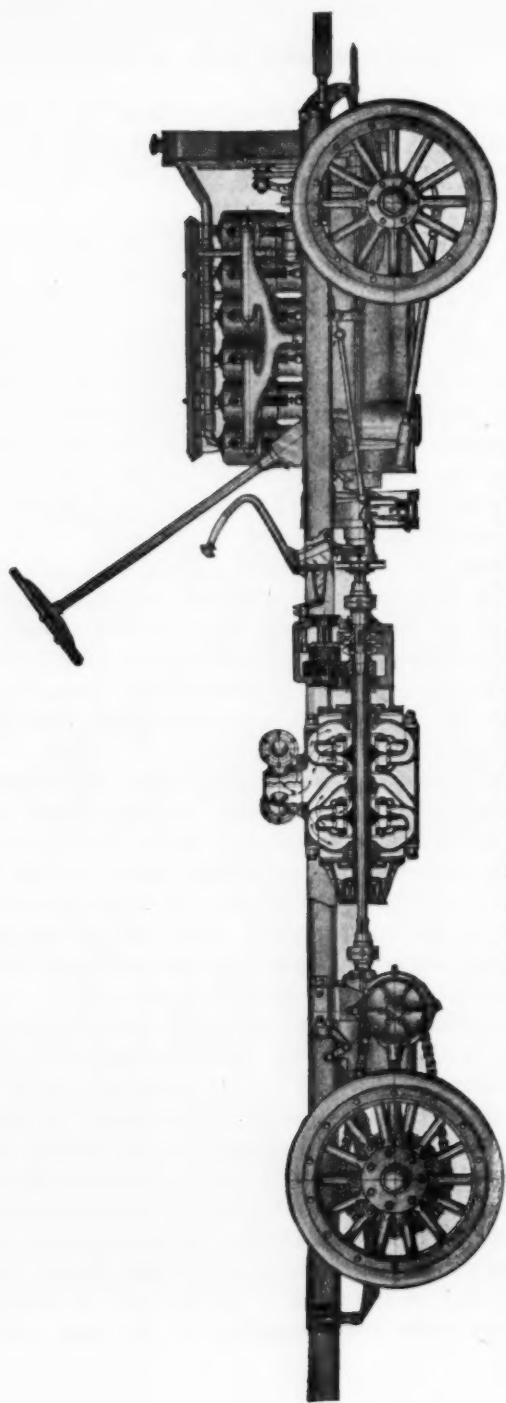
SIDE VIEW OF CENTRIFUGAL-PUMP CHASSIS
